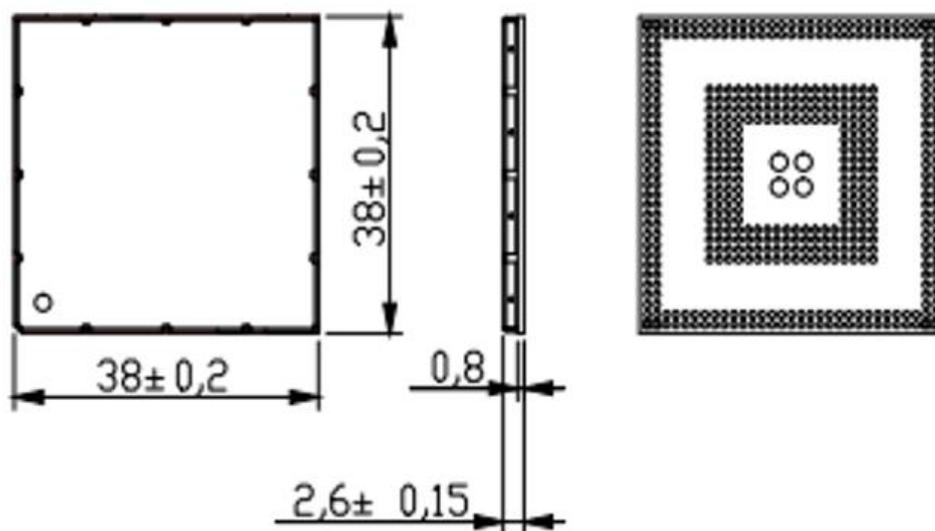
TurboX C610 SOM Drawing and Dimensions
